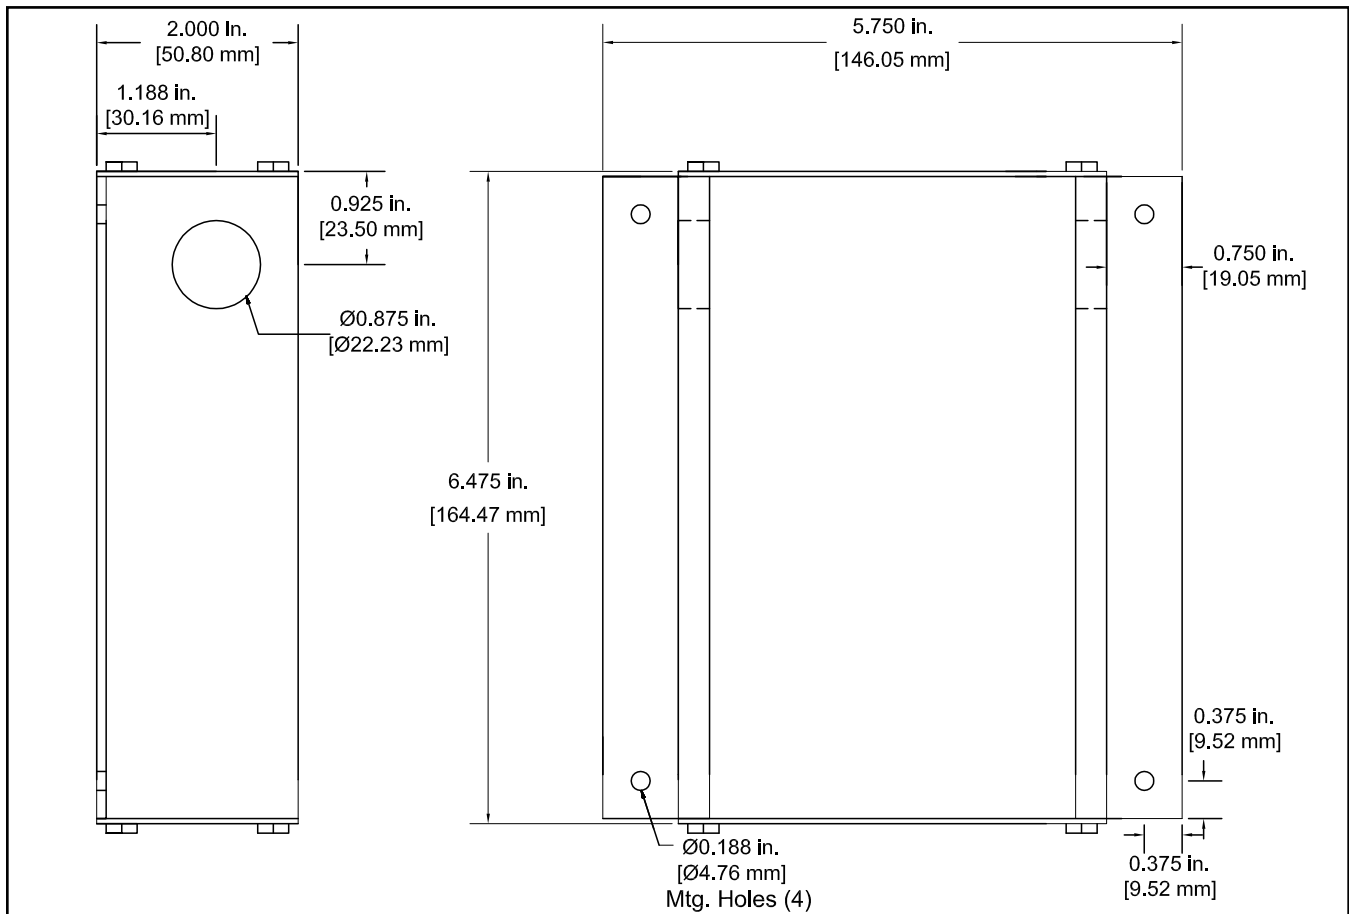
HTN104 Transmitter Mechanical Detail Drawing
